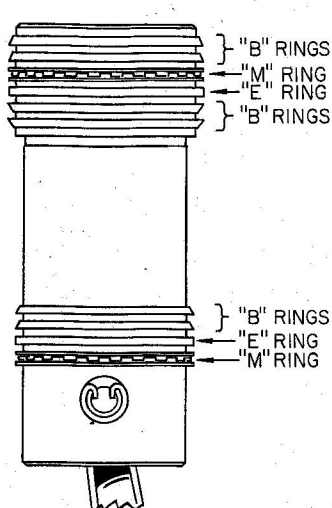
Double Acting 1st & 2nd Stage Piston
